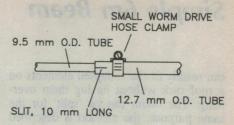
The centre half of each element is cut from 12.7mm o.d., 1.6mm wall aluminium tubing. The element length is then completed with a length of 9.5mm o.d. aluminium tubing slipped inside each end. Two 10mm long hacksaw cuts are made at right angles in the ends of the larger tubing so that the smaller tubing can be secured by means of a small worm-drive hose clamp. When the correct element length has been determined, the 9.5mm diameter tubing can be scored around the circumference right at the join, to mark the set position.
